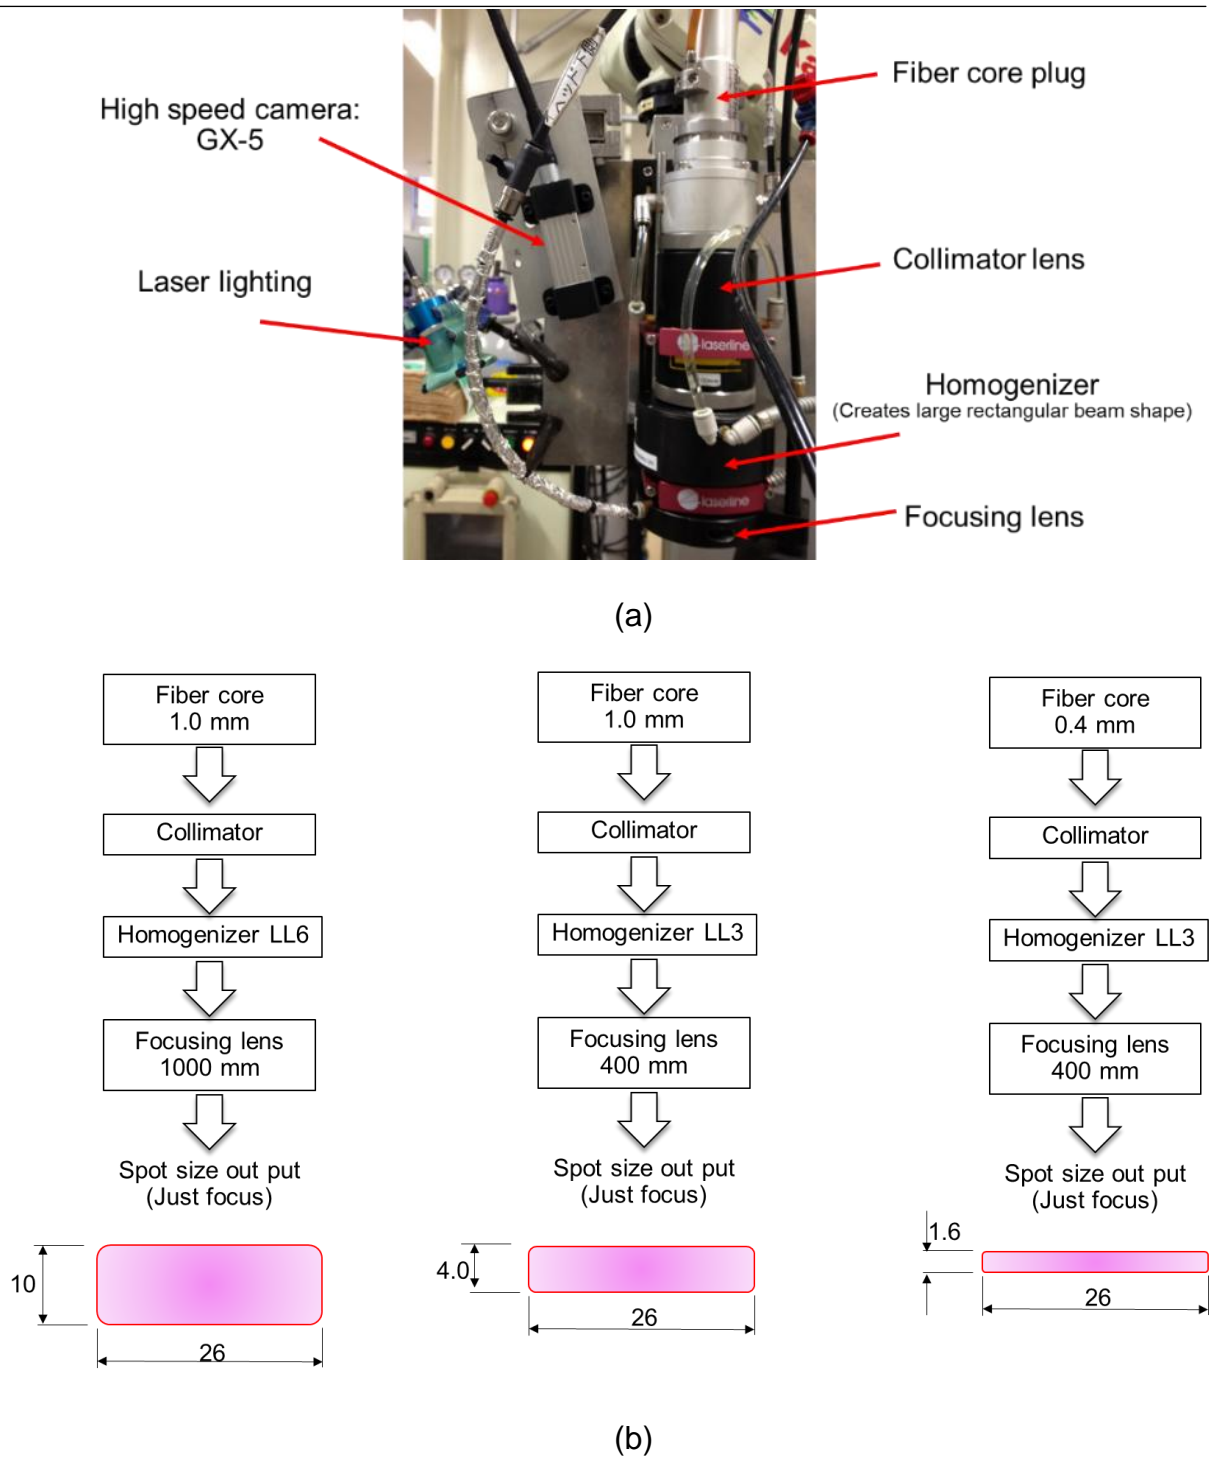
Assembly of the laser head for forms the large rectangular laser beam (a) actual laser head assembly and (b) simplified chart of laser head components to create the used large-rectangular laser beam.
